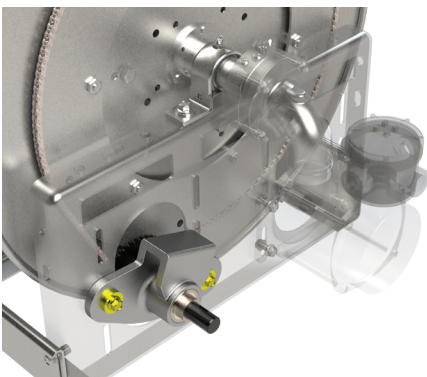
Reel with Spool Chain Attached to Reduction Unit
